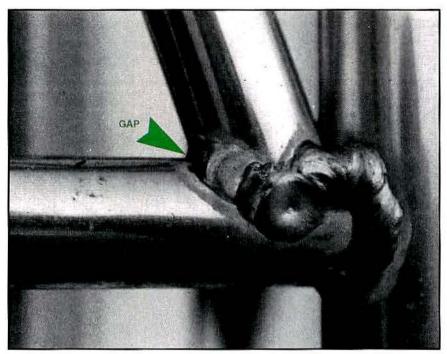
Tower welds have gaps because a closed weld would pressurize the tube and blow out one of the welds. Gaps do not weaken the weld because the welded joint is stronger than the tubing it joins. Welding is done via the tungsten inert gas (TIG) process.
